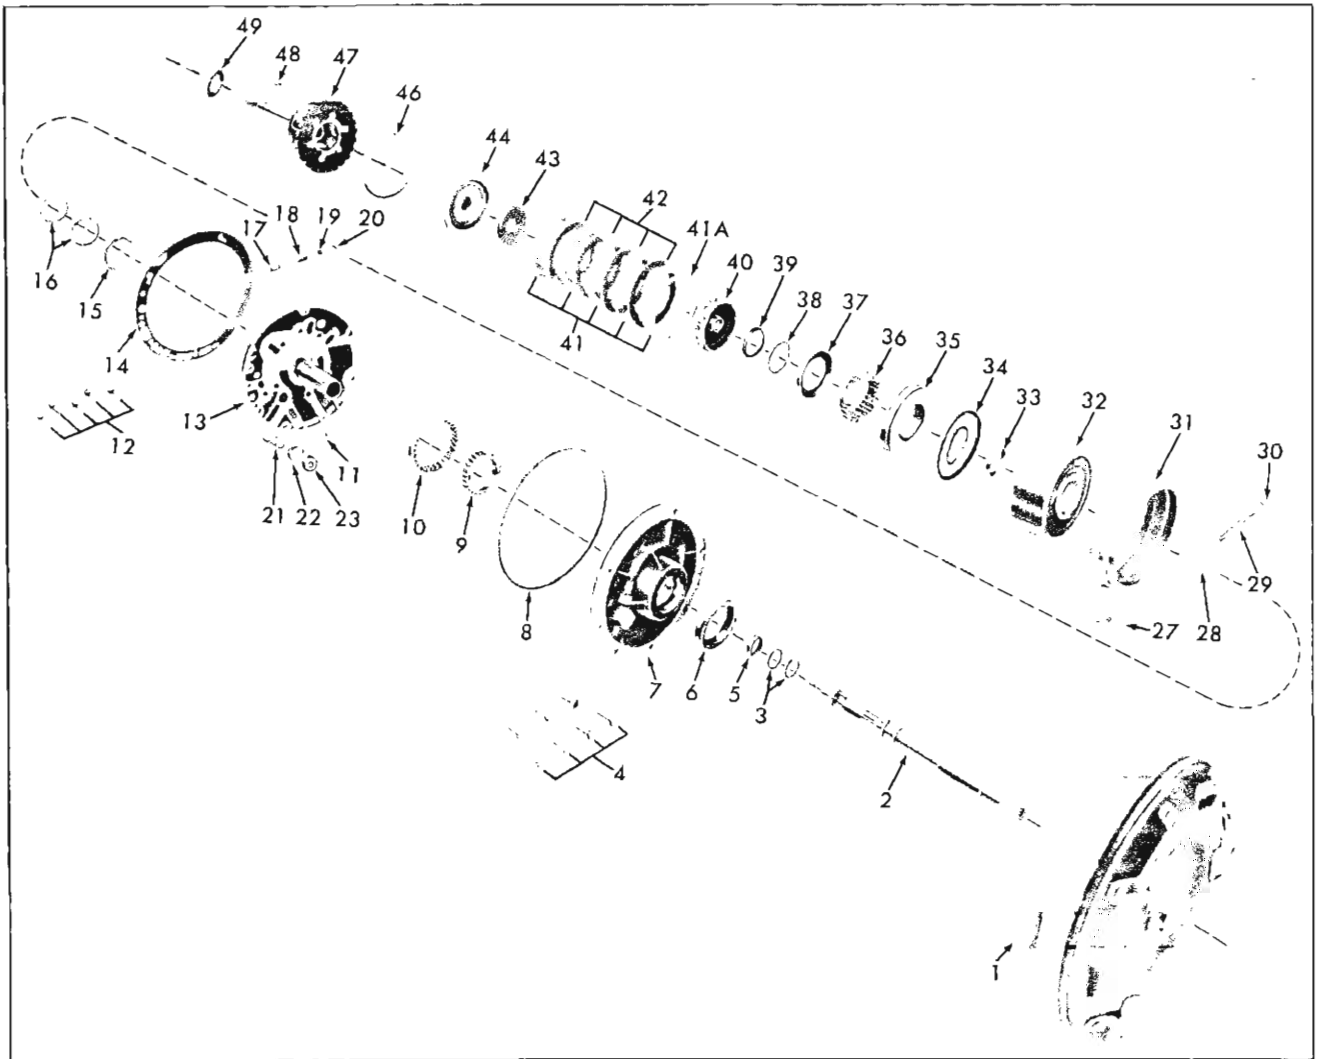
PG—Internal Mechanism—Exploded View (Typical)
